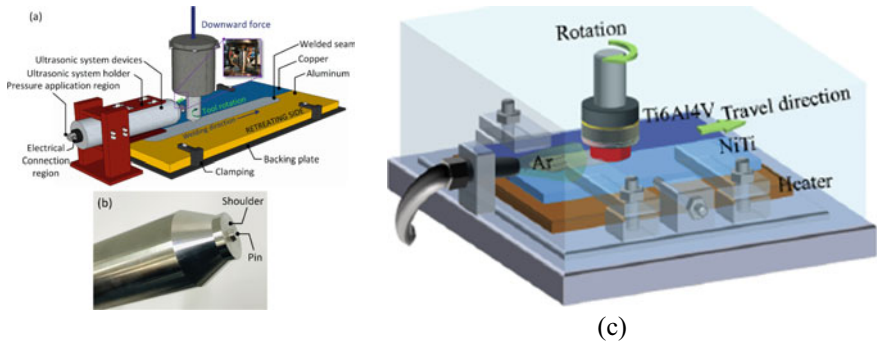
a Joining of Al and Cu by FSW and UVaFSW processes, and b H13 steel tool used in FSW [9] c Back heating assisted FSW [11]
